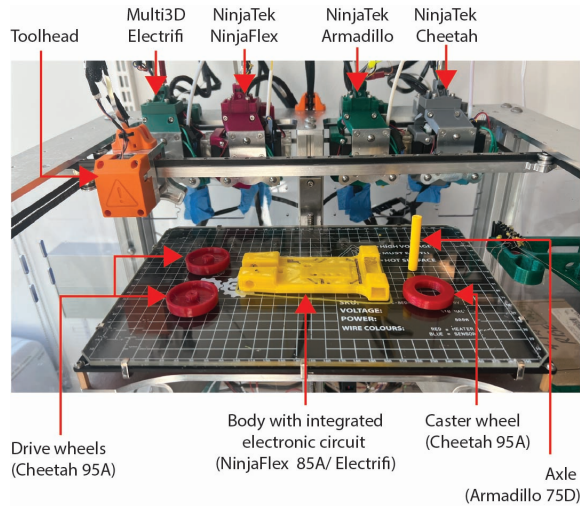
Picture of the E3D Toolchanger print bed after the robot is printed. The robot body with embedded copper-filled traces, two drive wheels, a caster wheel, and an axle are printed in a single job.
